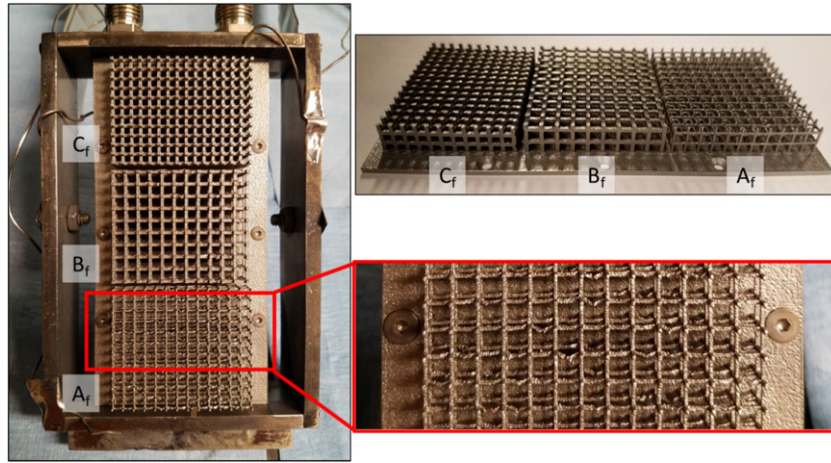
Left: tri-fold foam plate installed in the base module. Top right: side view of the tri-fold foam plate. Bottom right: close-up view of the case A_f foam displaying machining defects.
